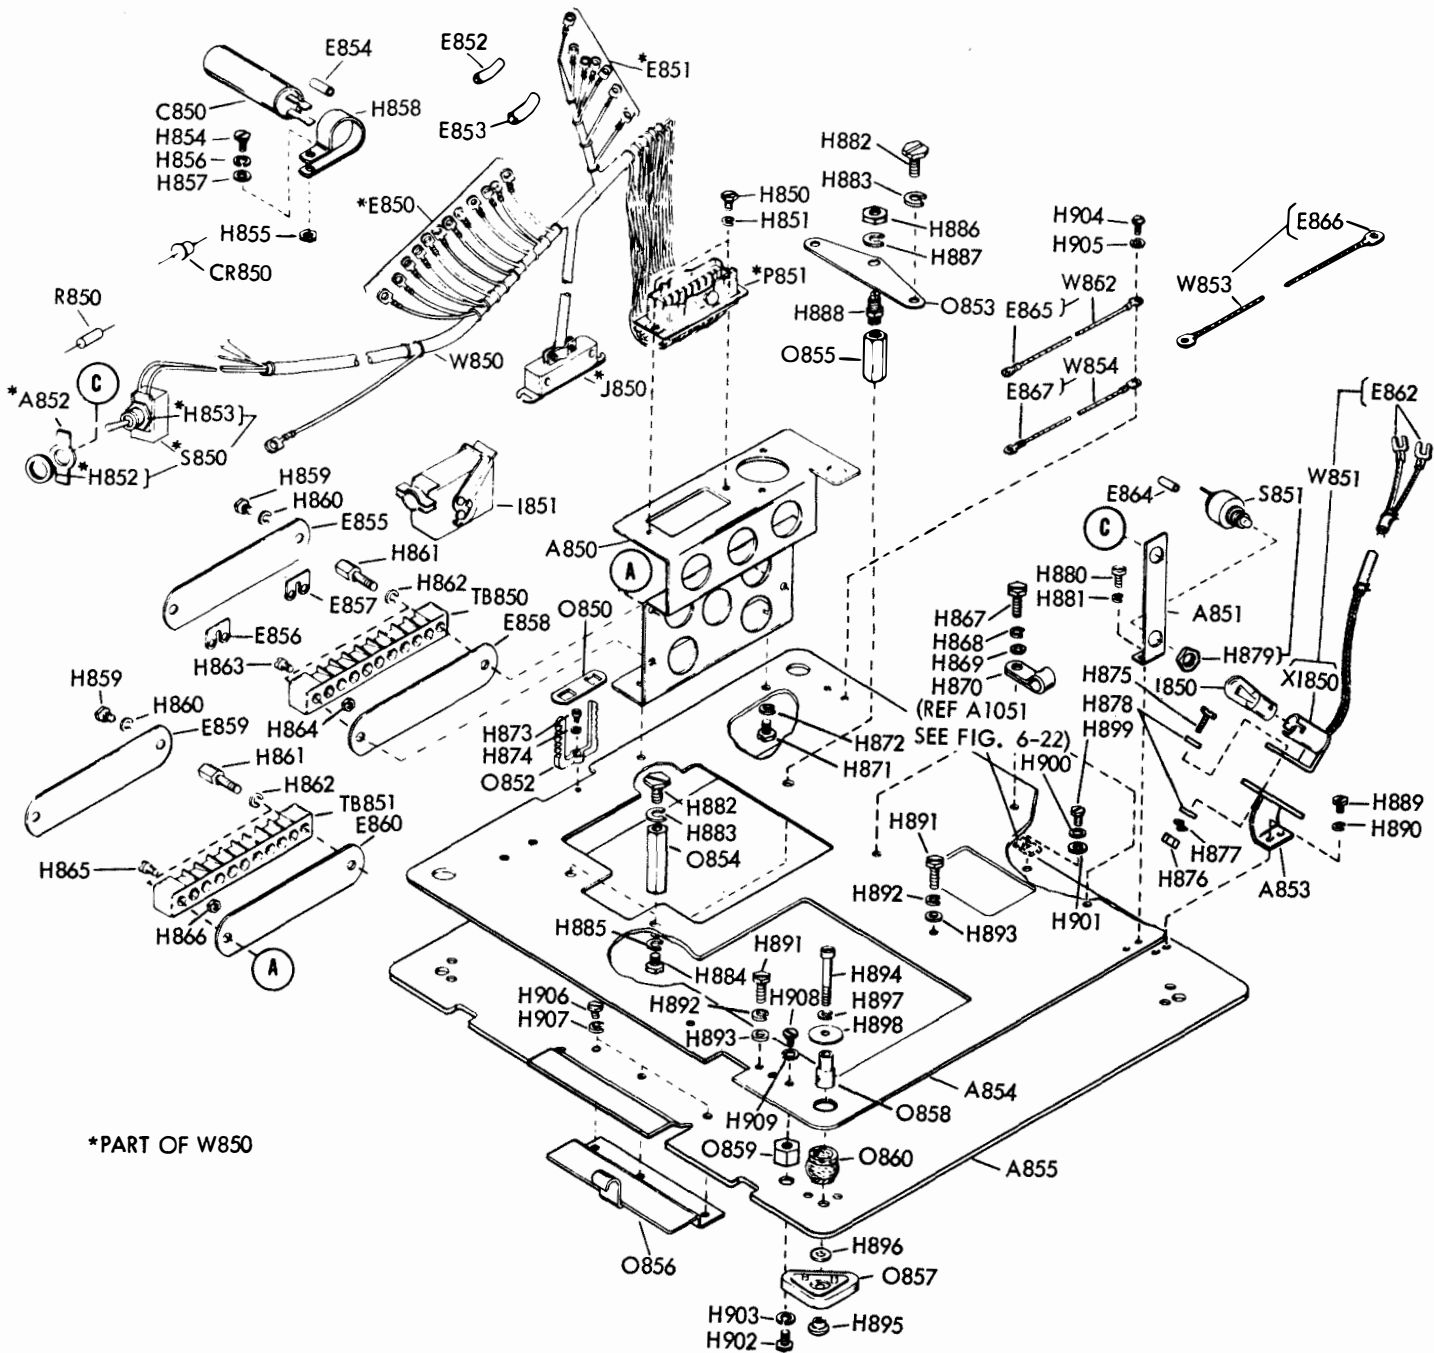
Keyboard - Base, Casting Assembly (TT-253/UG, TT-253A/UG and TT-292/UG)
